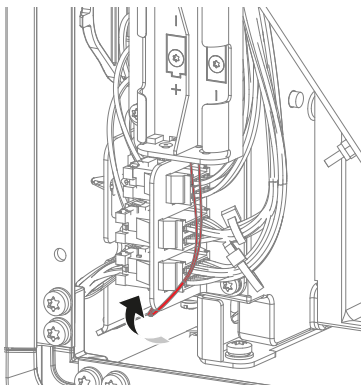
Guide the wires (marked red) towards the front side of the projector
